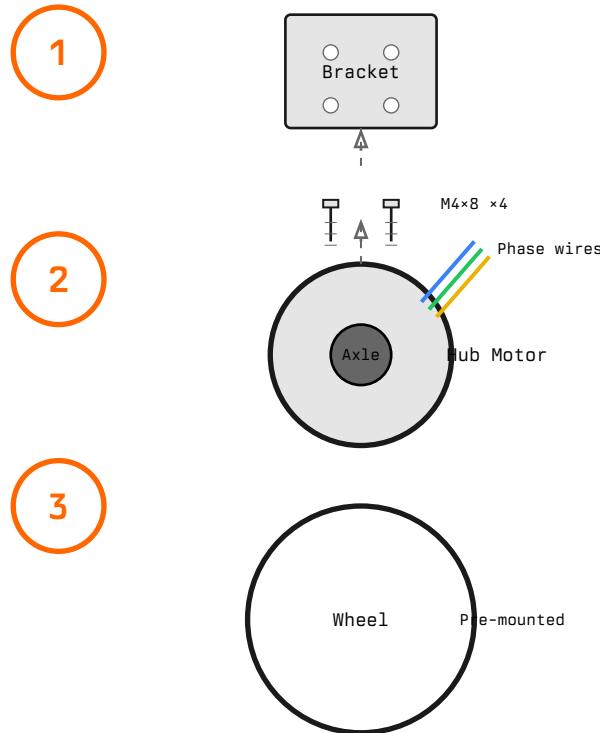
Motor installation sequence. Wheels typically come pre-mounted on hub motors.
